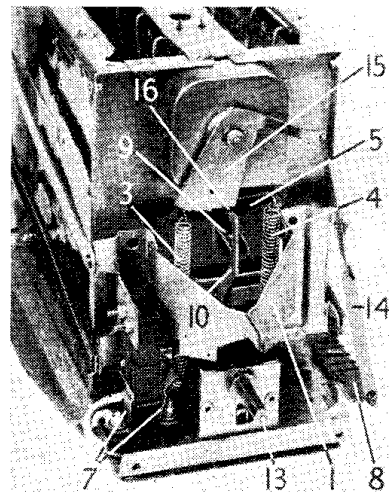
Clockwork "timer" together with thermostatic compensating mechanism and manual browning control are assembled at one end of toaster
